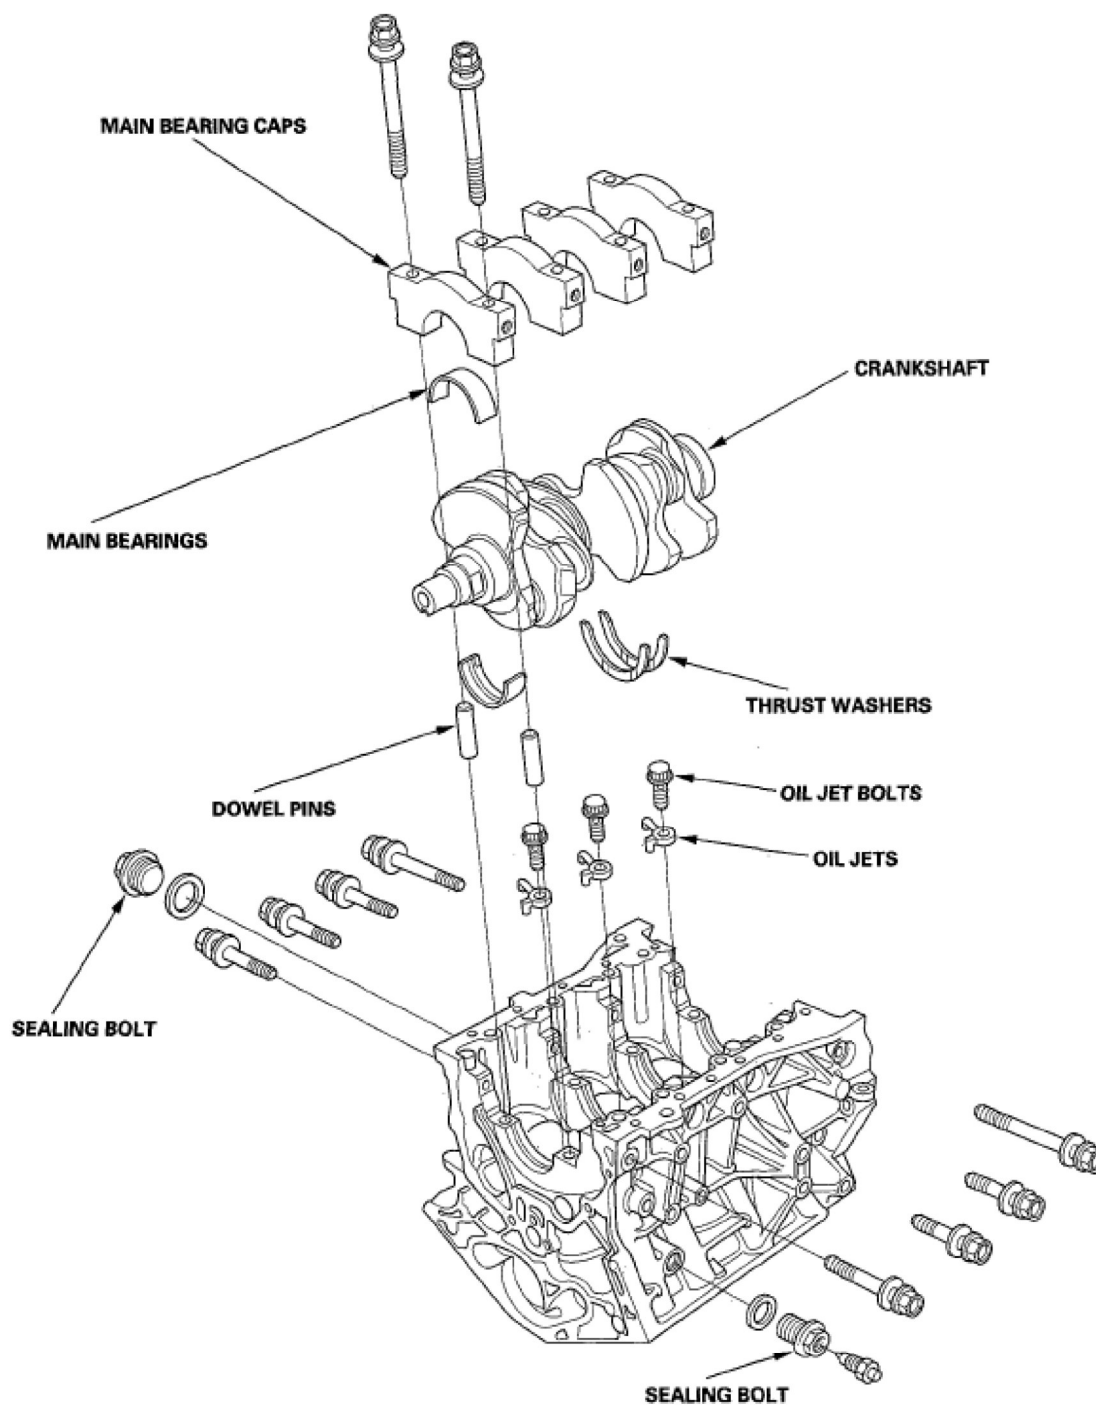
Identifying Engine Block Component Location - '07 Model J35A7 Engine
